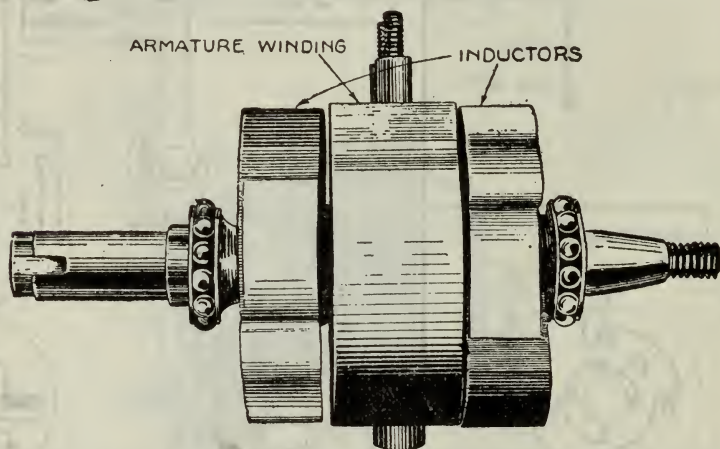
,954.—Remy ball bearing shaft showing inductors and stationary armature of inductor magneto. This type of magneto consists of a winding which is held stationary between the pole pieces, on either side of which revolves a *laminated steel inductor*. Inasmuch as the winding is held rigidly stationary, such construction eliminates all revolving or moving wires, all sliding or wiping contacts, collector rings, etc. This design permits of rugged electrical, as well as mechanical, construction. In operation, at each half turn of the inductor shaft, the direction of flow of the lines of force through the winding is reversed, producing in the winding two electrical impulses for each complete revolution. The stationary winding is directly connected through the magneto circuit breaker with the primary of the secondary coil used with the magneto. The timing of the spark is accomplished by shifting the circuit breaker around the inductor shaft, to which is attached the circuit breaker cam. The timing range is 35 degrees.
